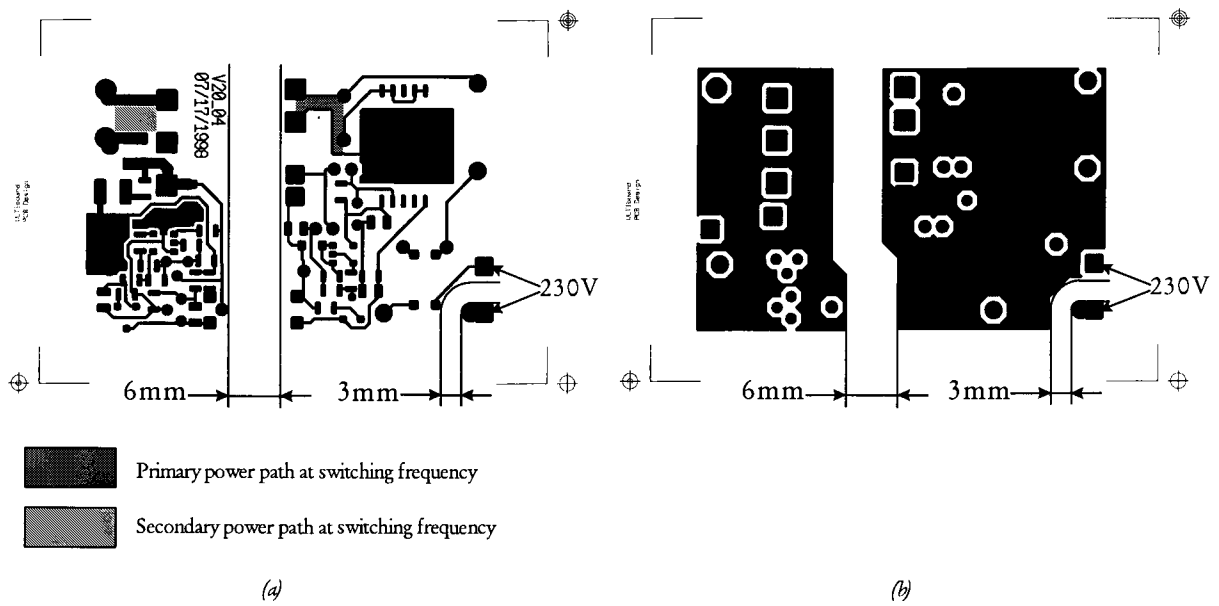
The (a) bottom and (b) the top side of the printed circuit board
